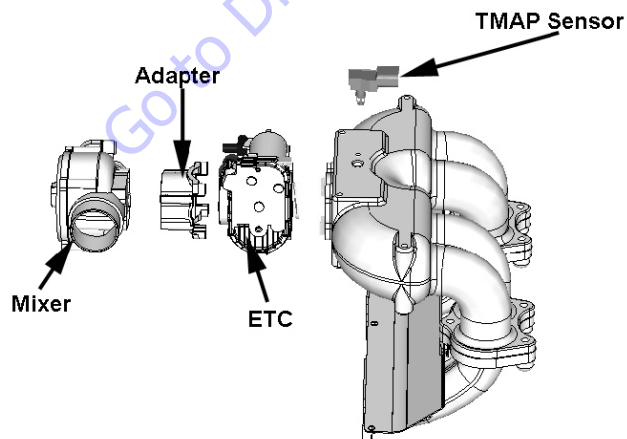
(TMAP) Sensor & Electronic Throttle Control (ETC)
